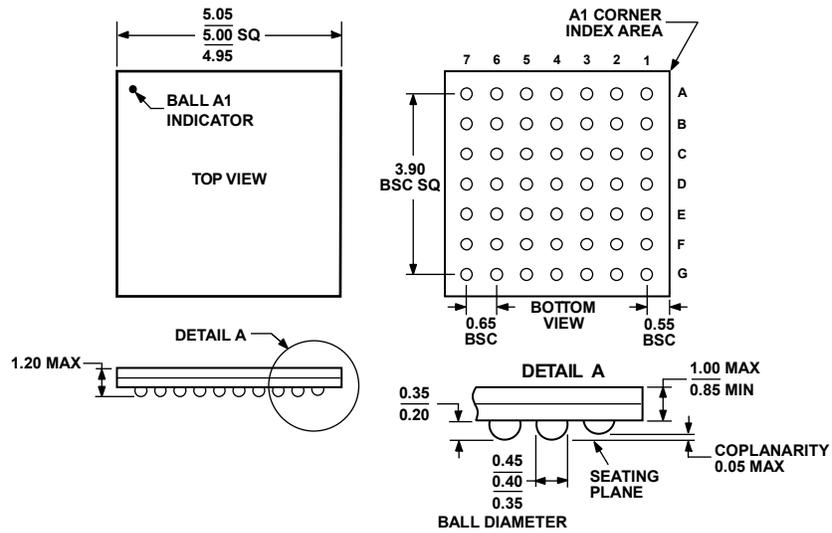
49-Ball Chip Scale Package Ball Grid Array [CSP\_BGA]
